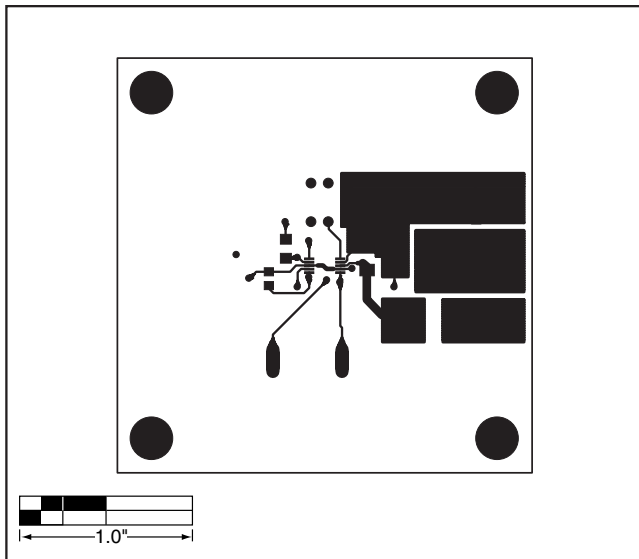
MAX1760 EV Kit PC Board Layout—Component Side
